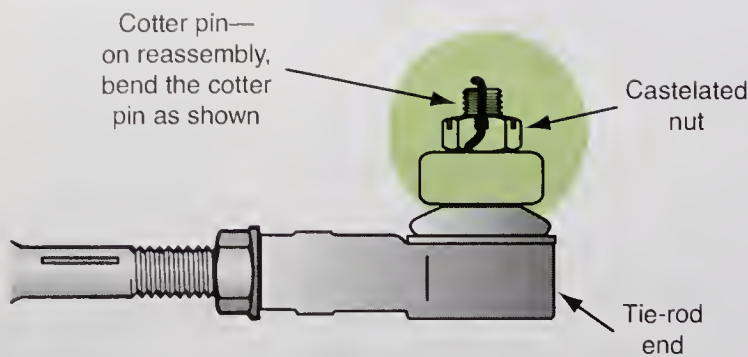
Proper installation of cotter pin in the tie-rod end.
